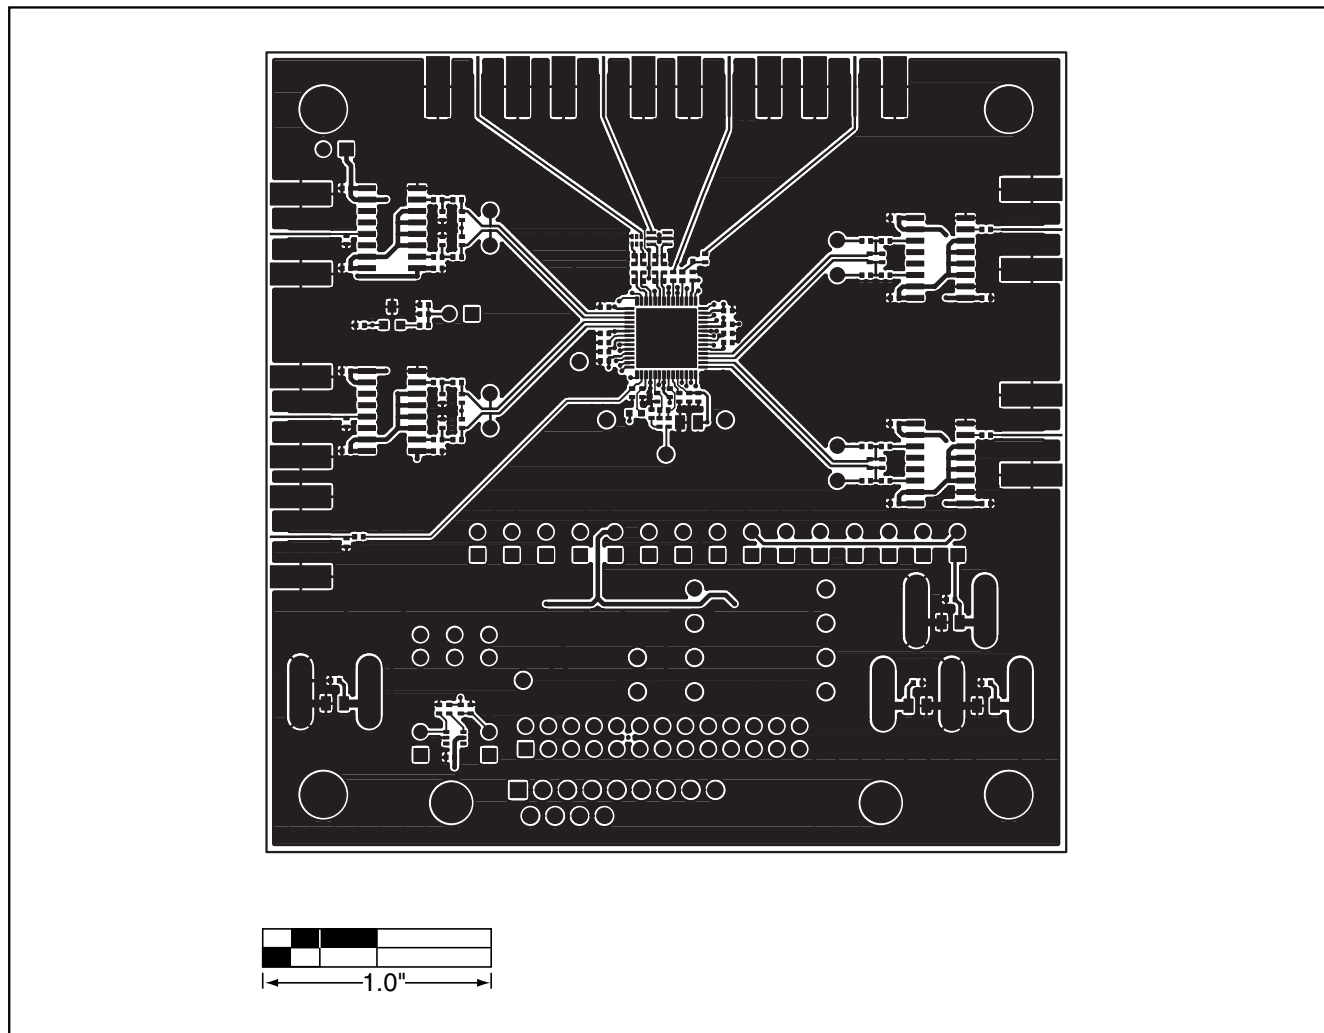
MAX2825/MAX2826/MAX2827 EV Kit PC Board Layout—Component Side
